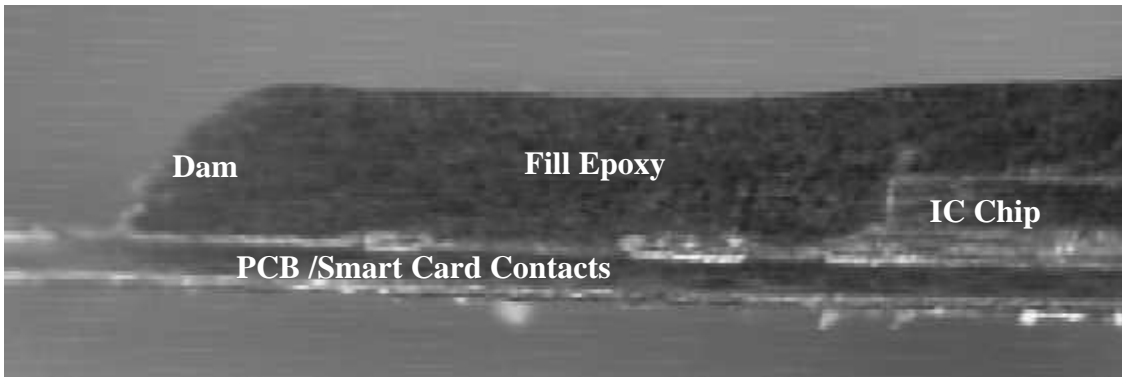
Section through a Dam & Fill Encapsulation, IC Chip and PCB
